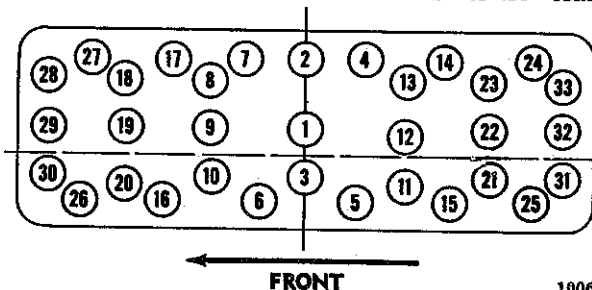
CYLINDER HEAD BOLT TIGHTENING SEQUENCE
